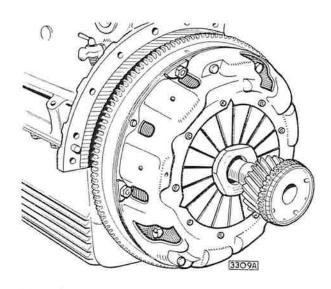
Centralising the driven plate on the flywheel by means of a dummy plate.
